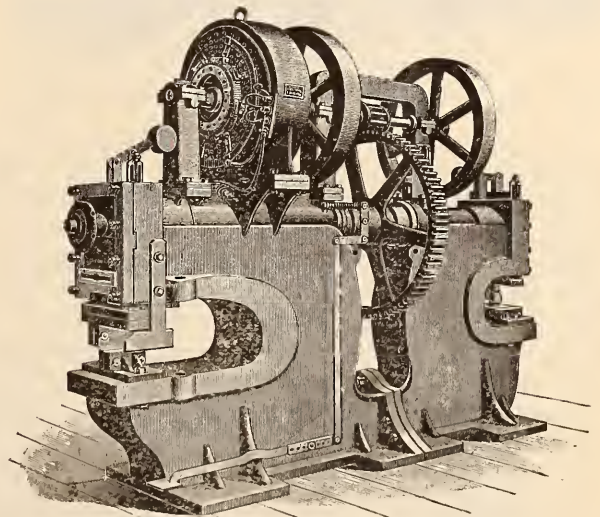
DOUBLE PUNCH, MOTOR DRIVEN, CINCINNATI PUNCH & SHEAR CO.
